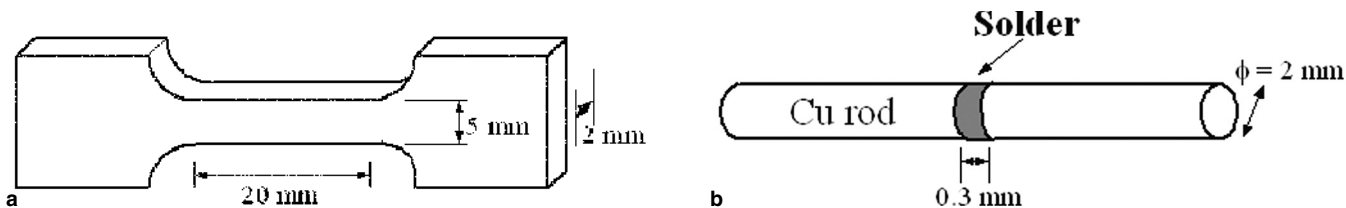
The schematic configuration of the tensile specimen: (a) dimension of bulk tensile specimen and (b) dimension of solder joint tensile specimen.
